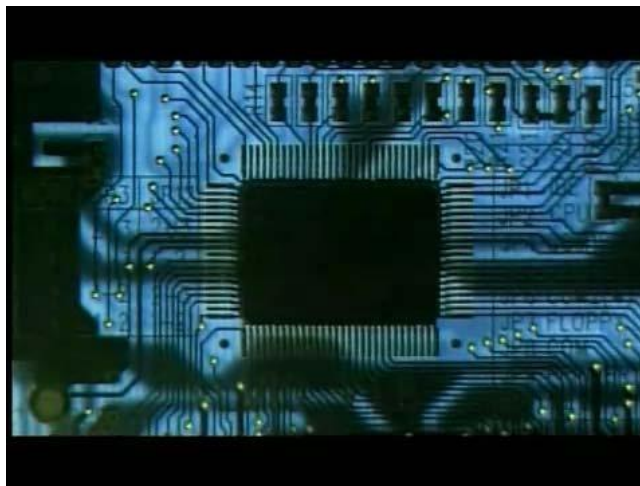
Visual inspection during the manufacturing of electronic components.
